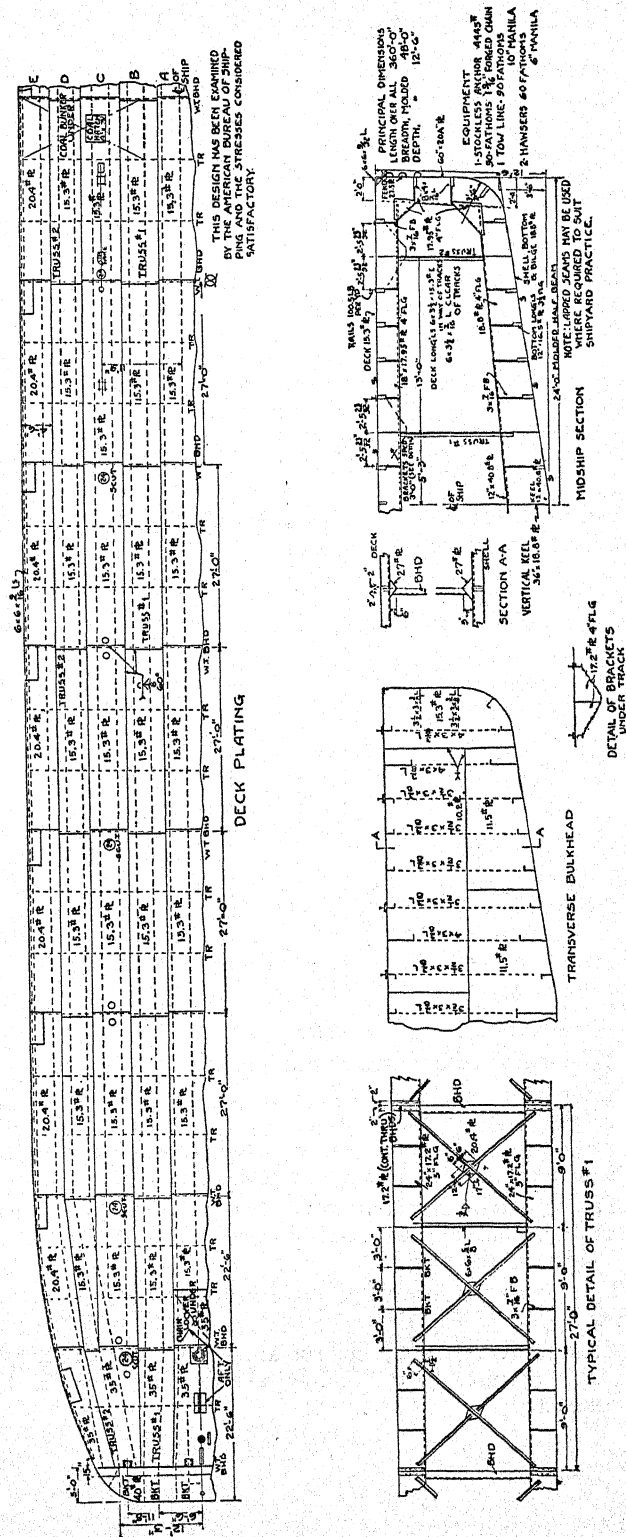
Structural arrangement of arc welded railroad car float. See also page 347a.
